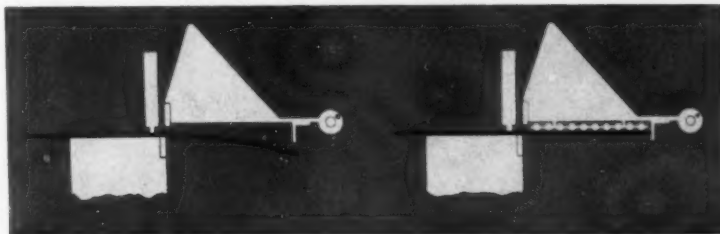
(Left) Without magnetic support flexible sheets may drop and miss back-gage. (right) Niagara sheet support holds ferrous sheets level for accurate gaging
